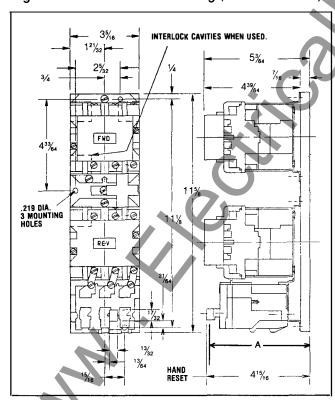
A250 Dimension Drawing (Dim. in inches)
